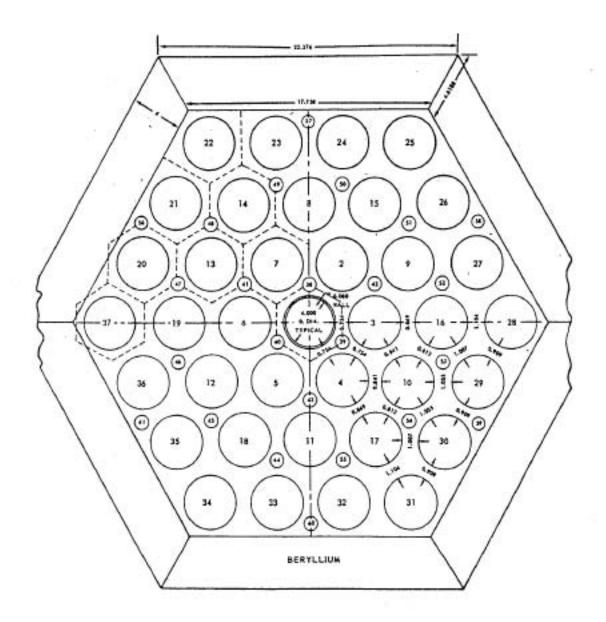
D101A2 Active Core Dimensions and Tube Layout
